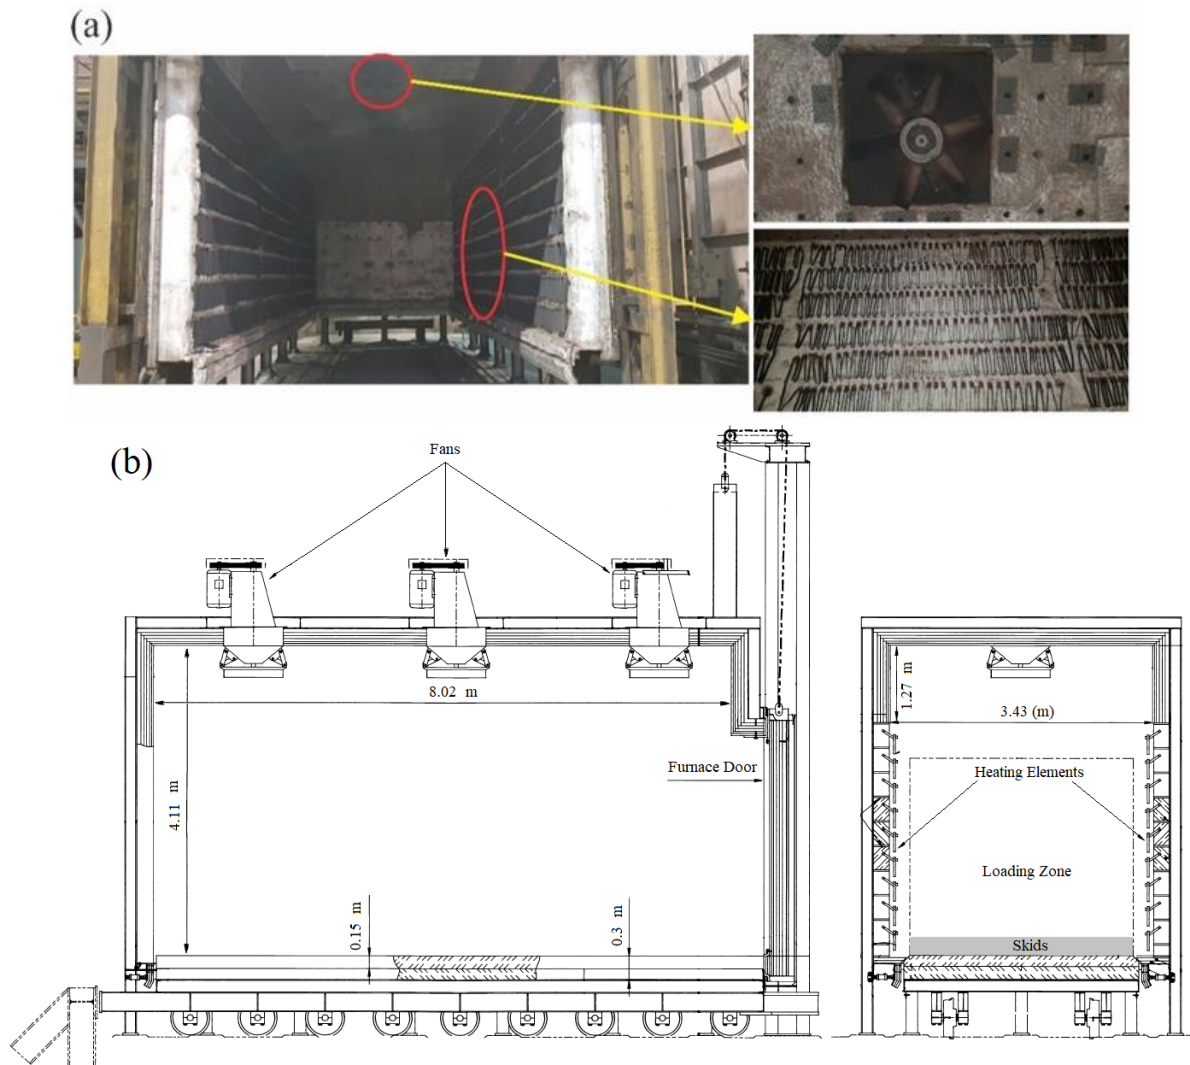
(a) Car bottom electrical furnace and (b) its corresponding drawings and dimensions [34].
